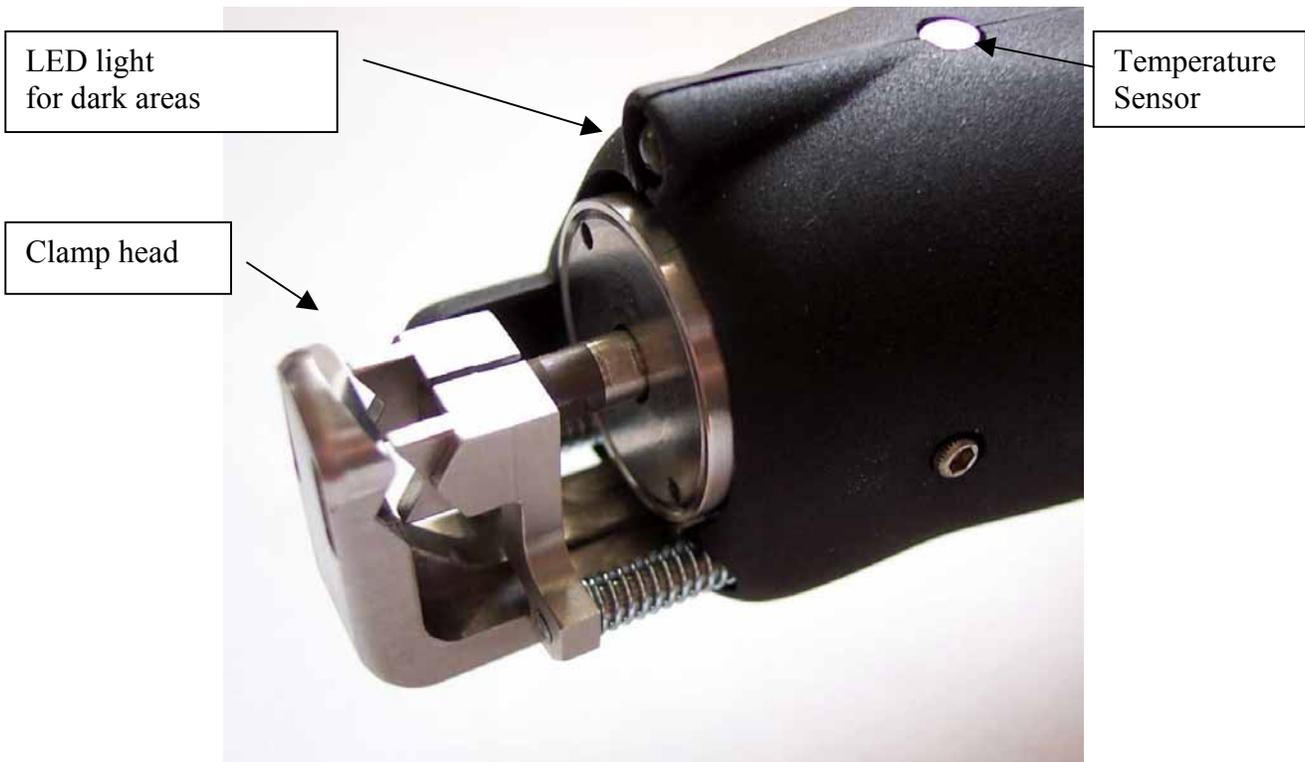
CABLE CLAMP ASSEMBLY CLAMP END
